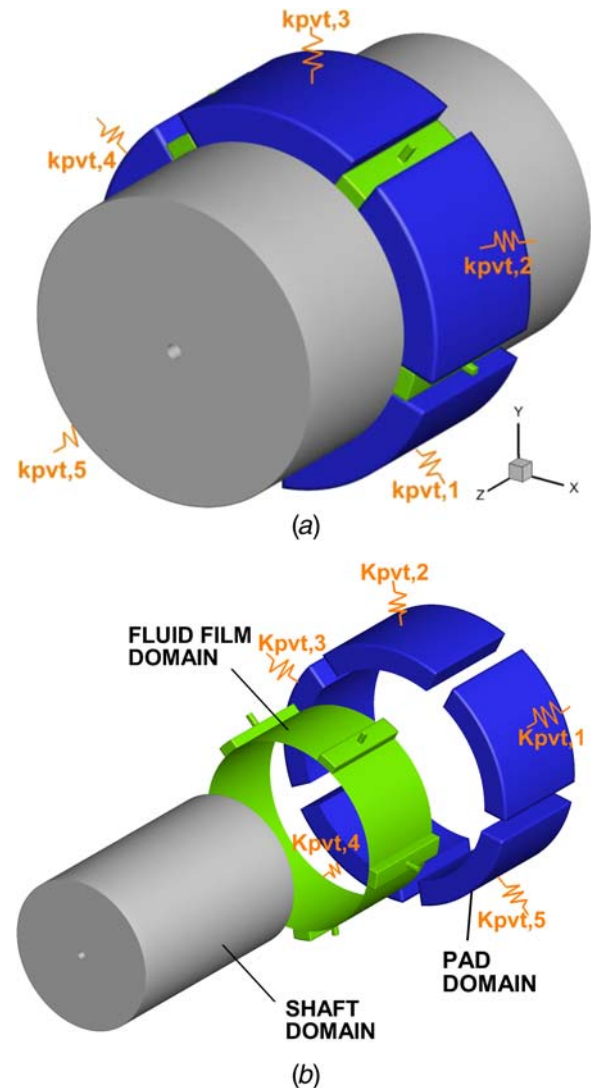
Configuration of tilting pad journal bearing model: (a) assembled view and (b) exploded view
